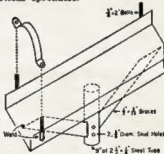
The boom mount is made of a 2 ft. length of 2 $\frac{1}{2}$ " x 3/16" channel with four 3/8" x 3" bolts welded as shown. The clamps are 3" x 3/16". The support plate is braced diagonally by $\frac{1}{2}$ " x 3/16" stock.
